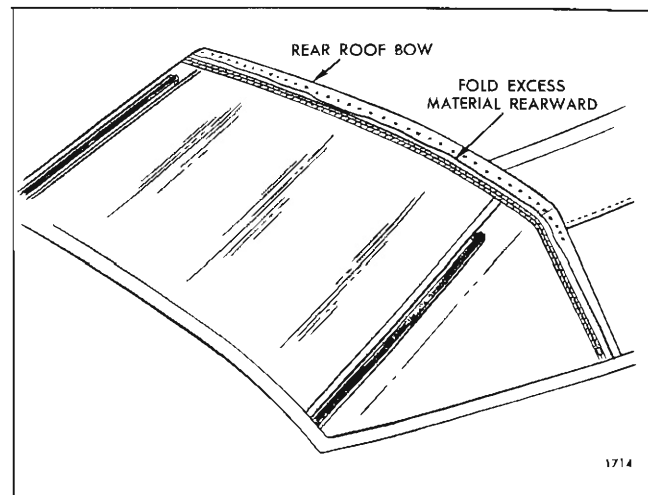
I-16 — Back Curtain Installation at Rear Roof Bow
